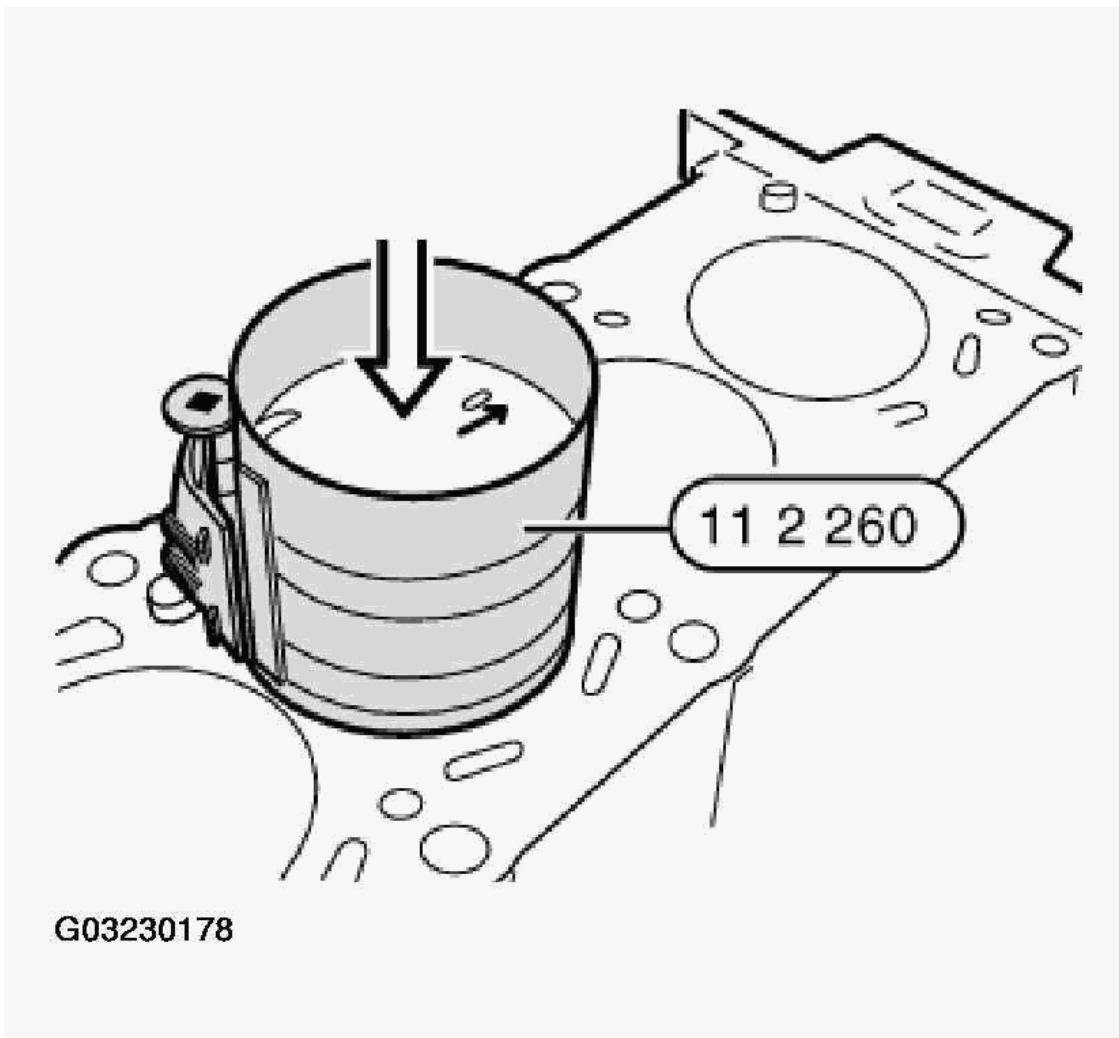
Aligning Piston Directional Arrow Towards Camshaft Drive
